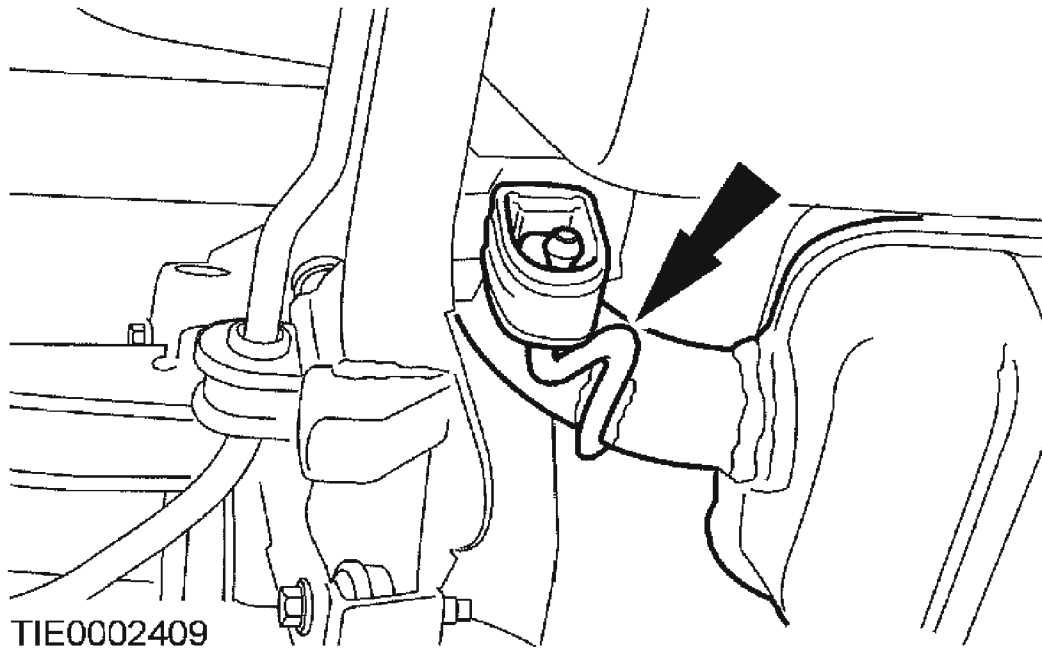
Detaching Front Muffler From Rear Exhaust Hanger Insulator
